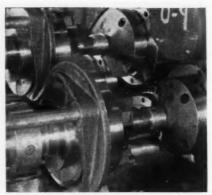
Two self-opening die heads in the fifth position on an open-end chucking machine. Large yokes trip die head when bottom of thread is reached.
